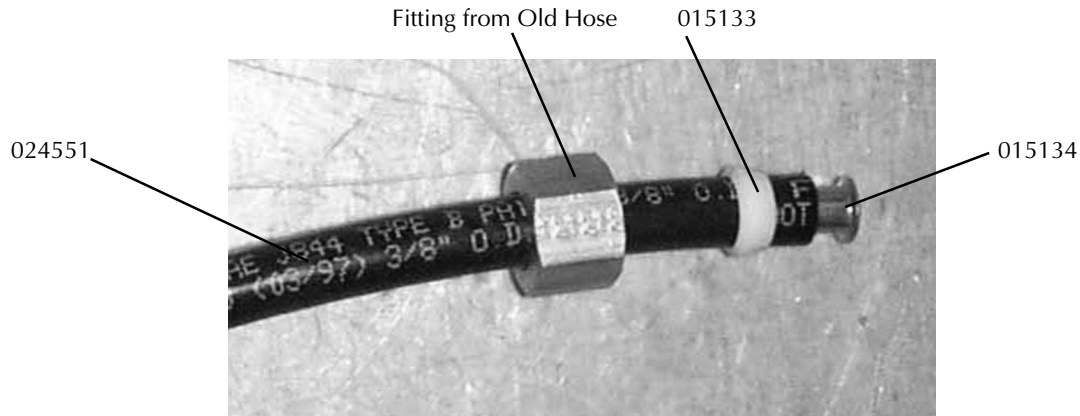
Tubing, Insert, Sleeve and Fitting Assembly
